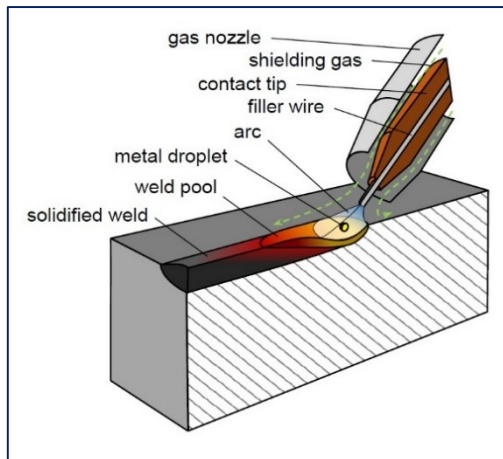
MIG-MAG welding principle [21]
